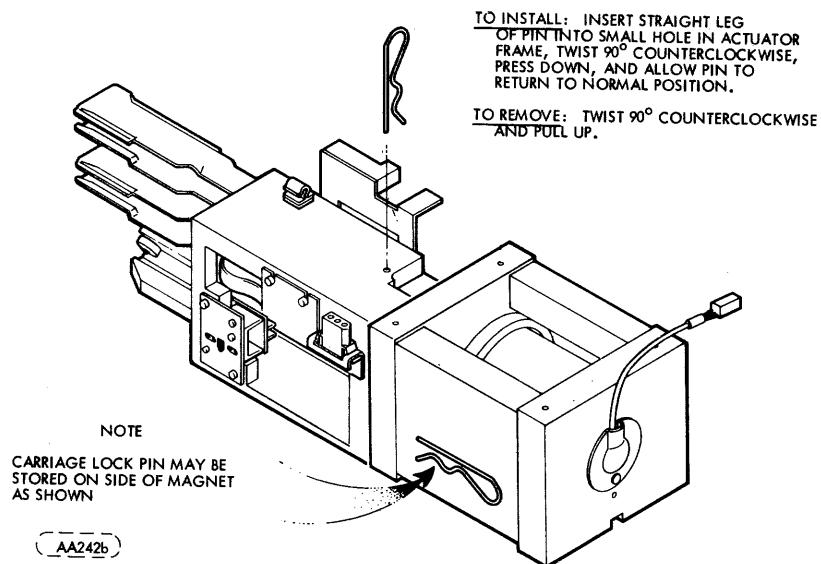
CARRIAGE LOCK PIN LOCATION
